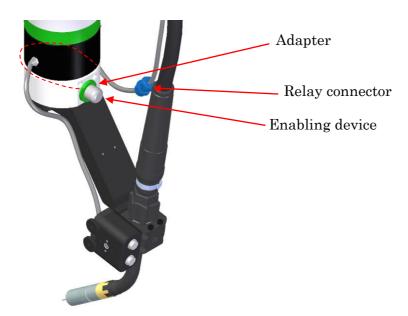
(b) Appearance after removing Manual Guided Teaching Handle
